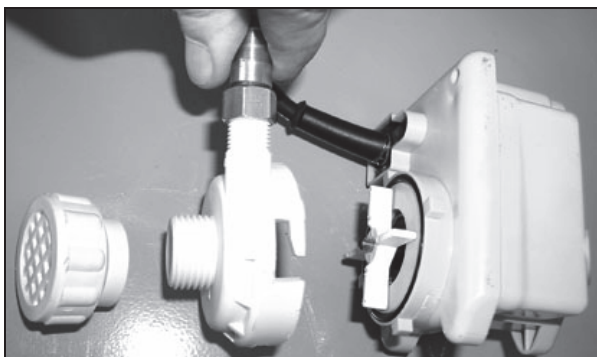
Exploded view of the wet-pit- (water-) pump
